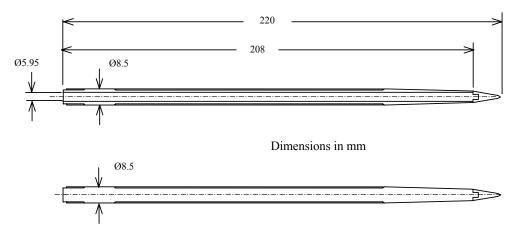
Outline sketch of the jacketed and unitary penetrator designs
